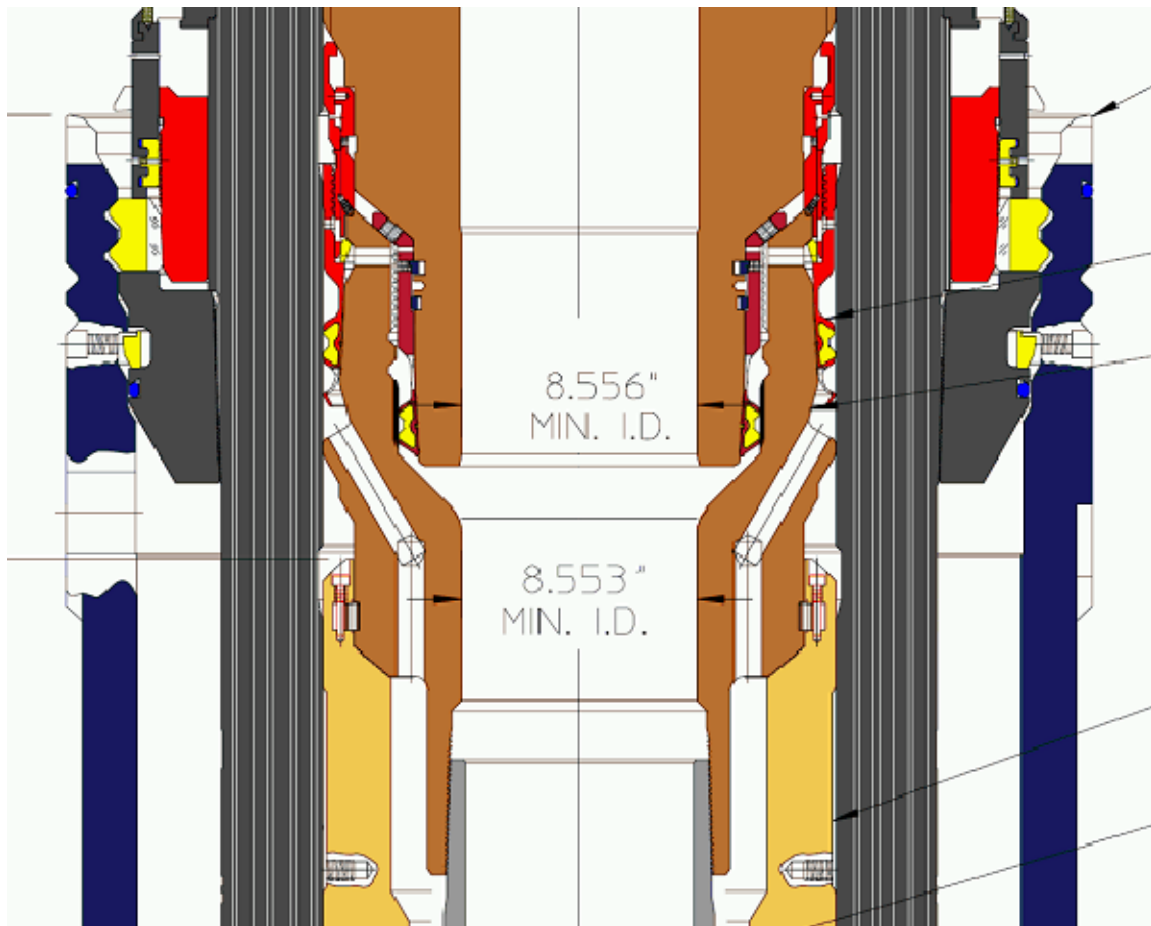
Casing Hanger and Seal Assembly Configuration at Wellhead
